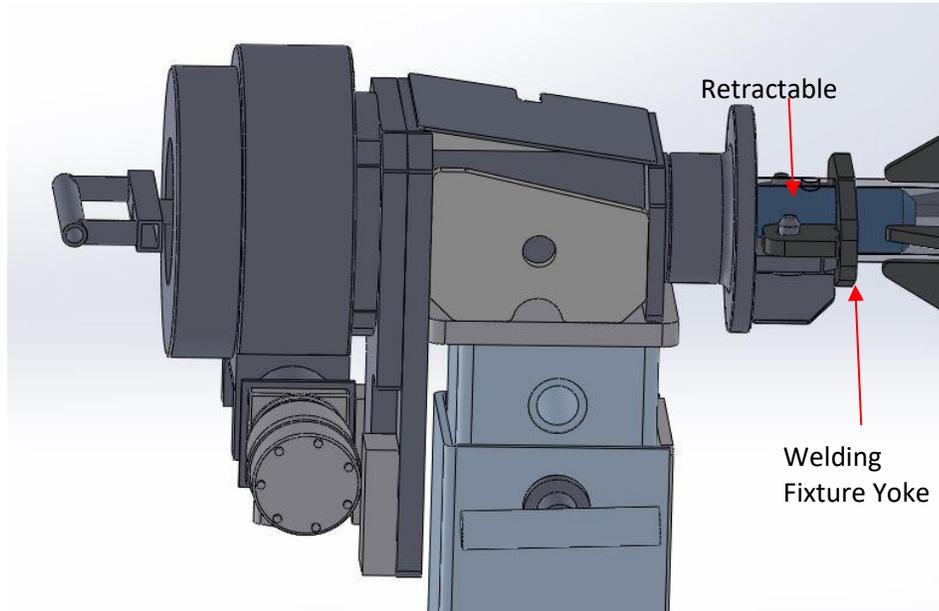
Drive End Iteration #1, Retractable Shaft Engaged with the Welding Fixture
